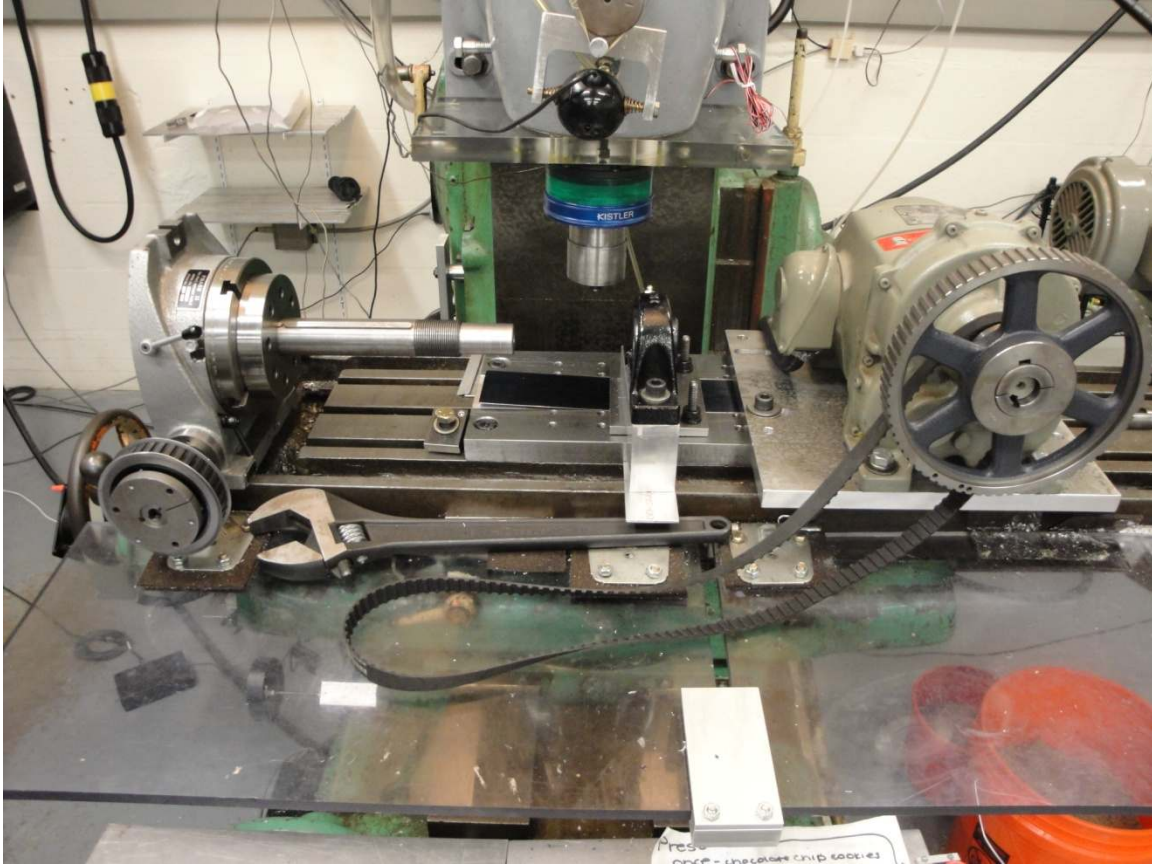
The rotary welding apparatus (grey, left), rotary bearing (black, center), and rotary motor (beige, right).
